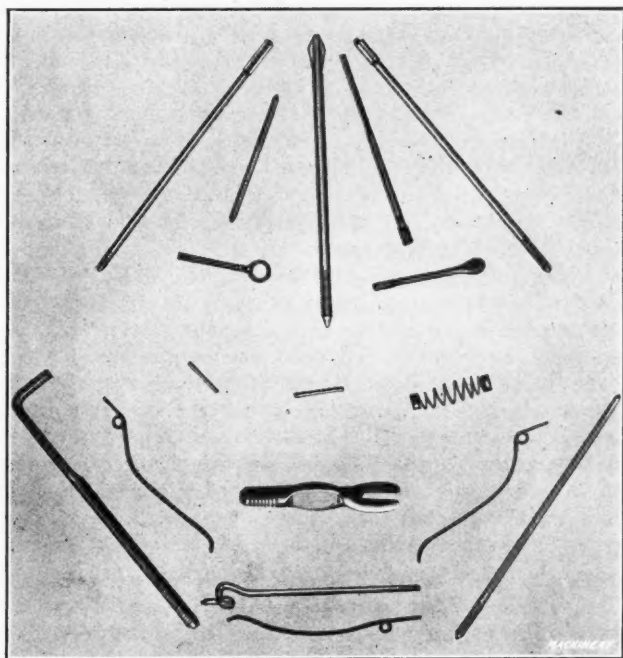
Some Wire Products used in the Manufacture of Pianos
